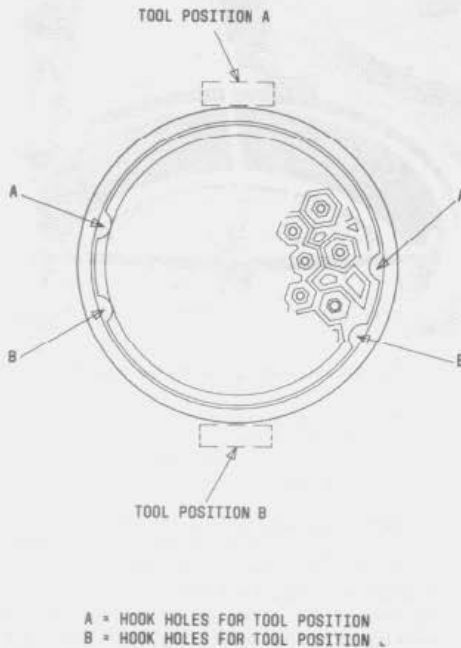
Selection of Tool Position and Appropriate Hook Holes
